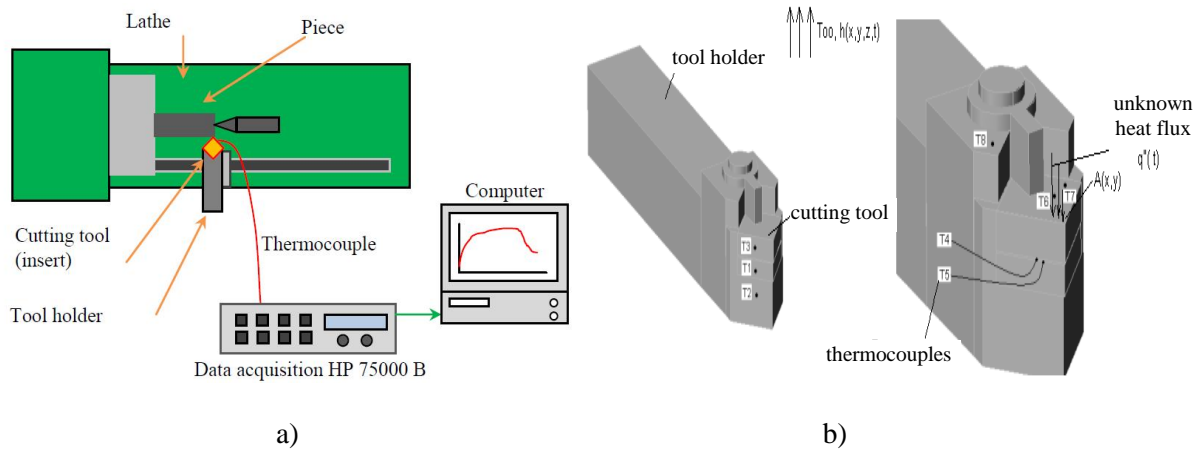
a) Experimental apparatus used to acquire the temperature signals in the tool during machining and b) detail of the position of the thermocouple welded to the tool.
